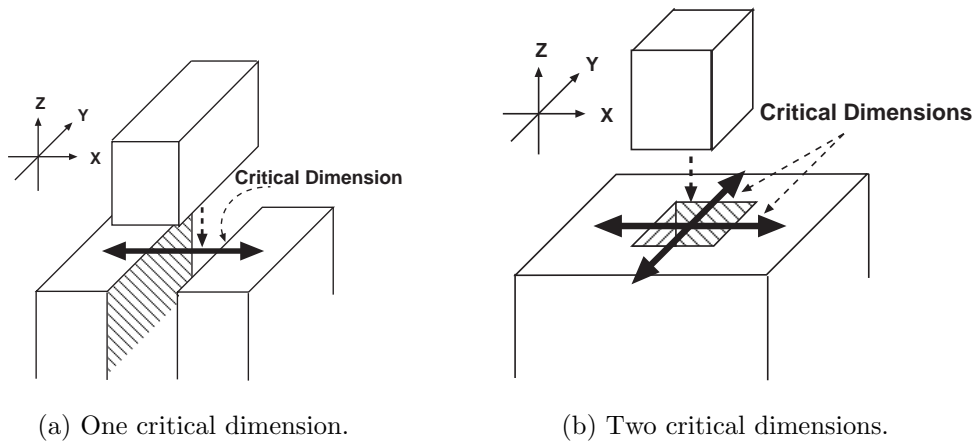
Critical dimensions for the insert assembly skill primitive.
